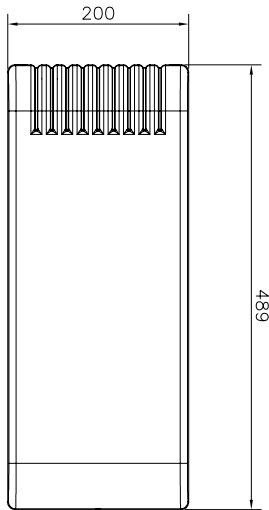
Mounting the passive cooling module for devices with integrated heat pump manager
